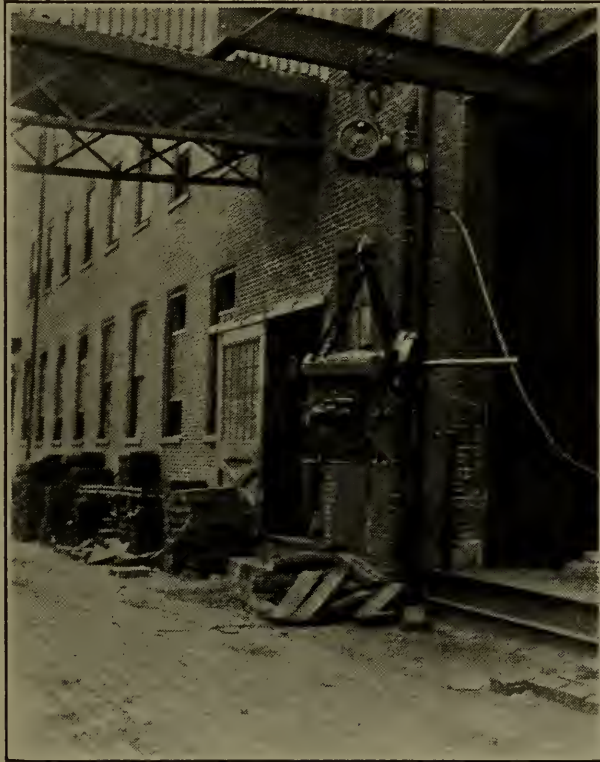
A pneumatic motor hoist employed on overhead trolley. Morse-Williams Plant, Otis Elevator Co., Philadelphia, Pa.
